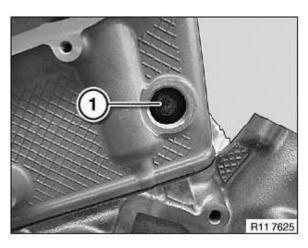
Identifying Bearing Pin Courtesy of BMW OF NORTH AMERICA, INC.
